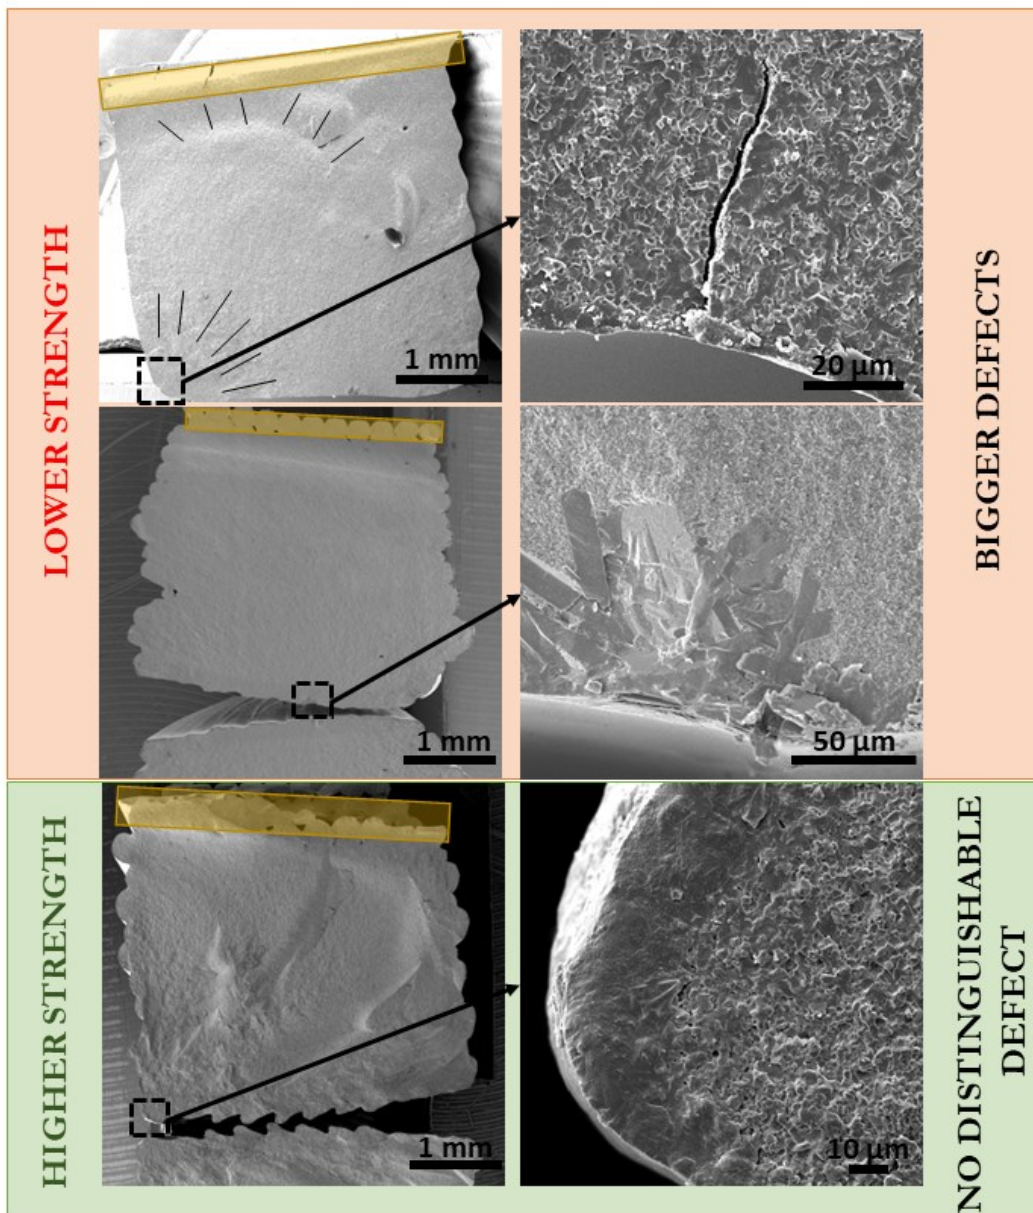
Analysis of defects in fracture surfaces of printed parts with lower strength (red) and higher strength (green).
